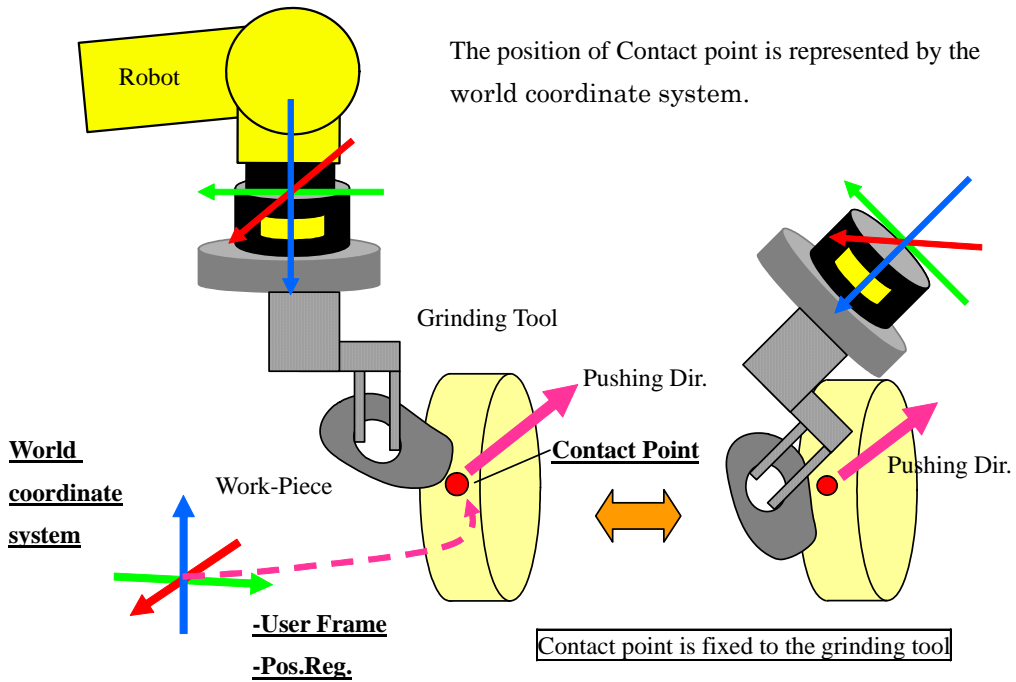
(h) Example 1 of setting USER to "3-Axis FS ContactP. Position"
